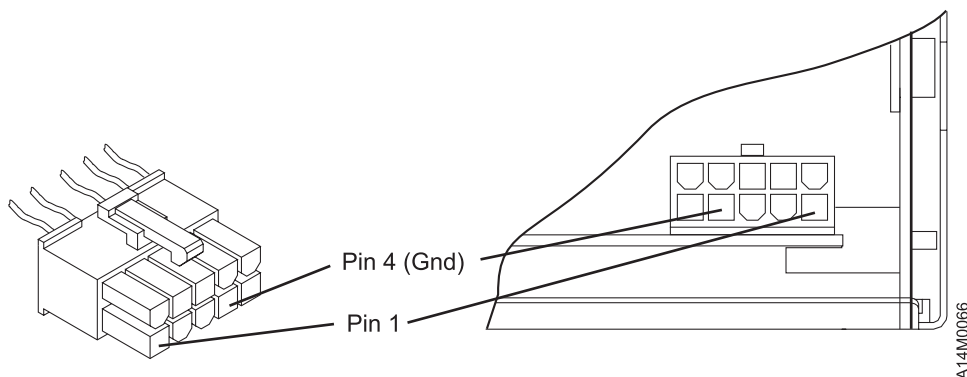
Pneumatic Motor Cable to Card Pack Cabling
